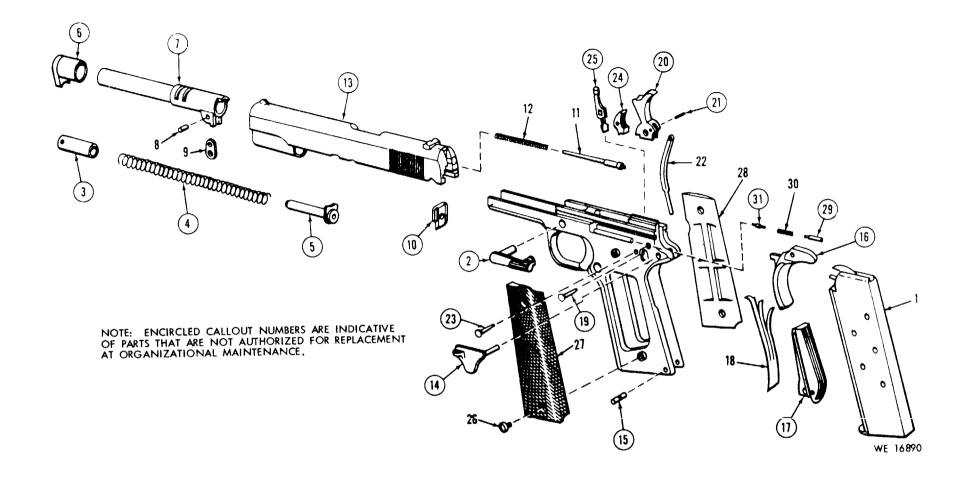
Caliber .45, Automatic, Pistol, M1911A1—partial exploded view.
